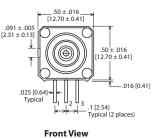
SHA21: Concentric Shafts, Solder Hooks, 2 Potentiometer(s) or RS + MP, 3/8" Bushing
